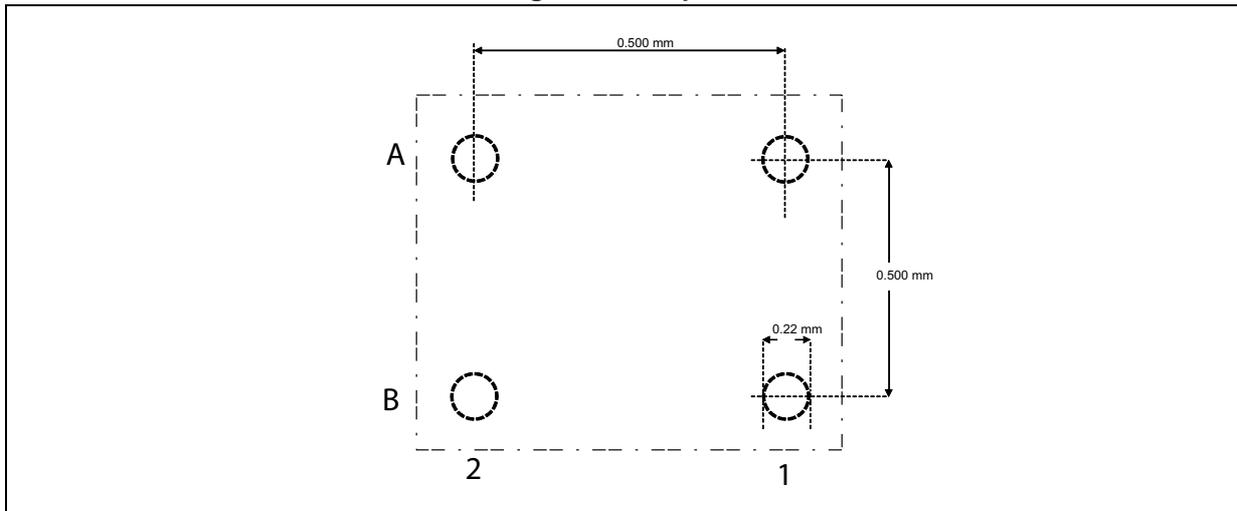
Footprint - 3 mils stencil - non solder mask defined
